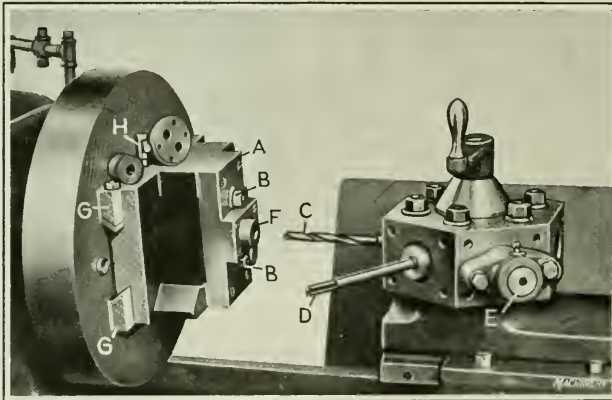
Indexing Turret Lathe Fixture used for drilling and reaming Two Eccentric Holes in Oil-pump Covers
